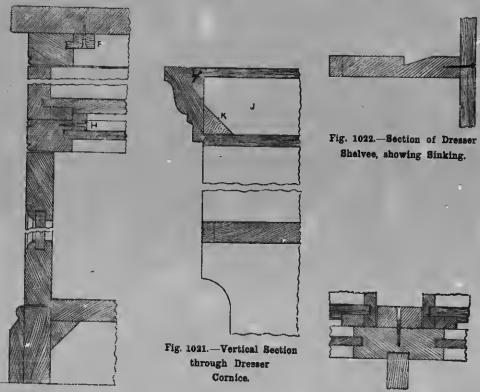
Vertical Section through Dresser Drawers and Cnpboards.
